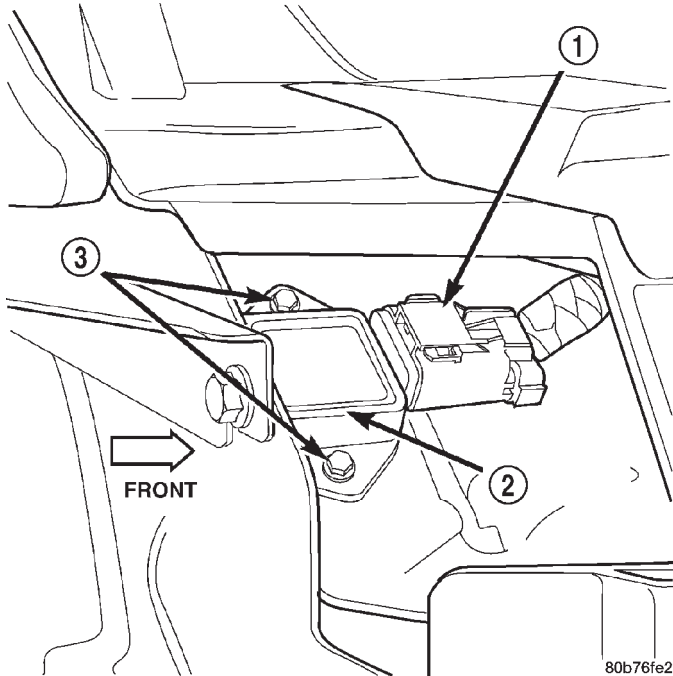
Radiator Cooling Fan Relay Removal/Installation
